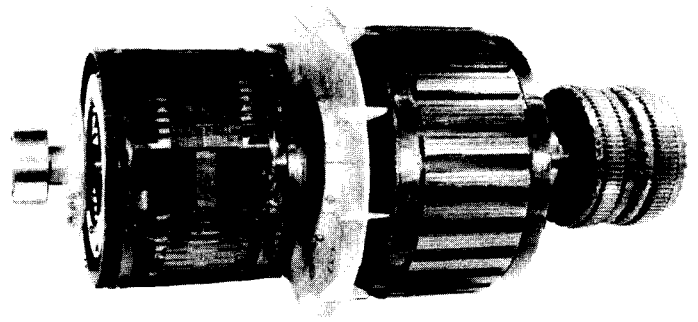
Motor - Generator Rotor, Brushless Exciter Armature Assembly with a Center Mounted Fan
